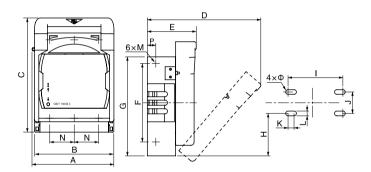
HR17N/D series fixed type installation and outline dimensions drawing
